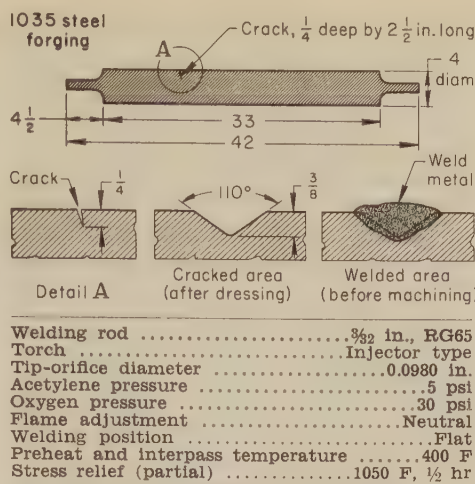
Roll in which a small crack was repaired by gas welding (Example 518)
